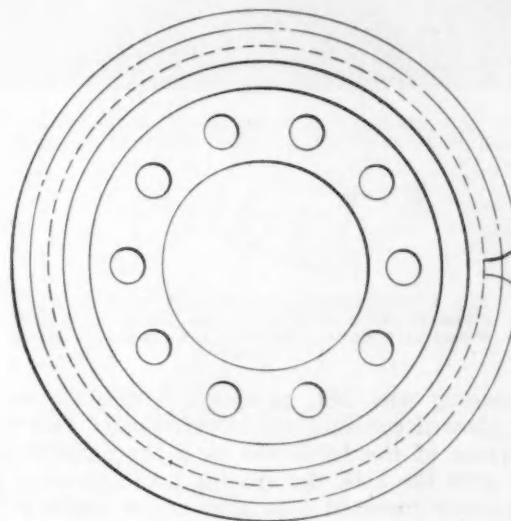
A TRANSMISSION GEAR APPROXIMATELY 6 IN. IN DIAMETER THAT IS GROUND ON BOTH SIDES BEFORE OIL HARDENING
